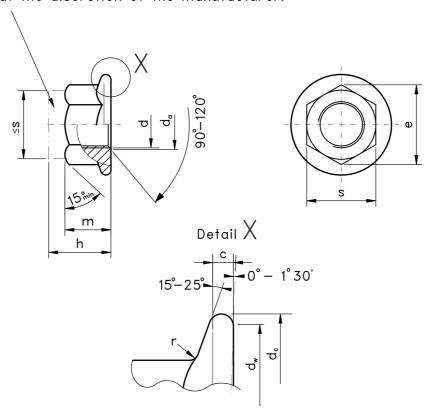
Hex Serrated Flange Nut with Nylon Insert
